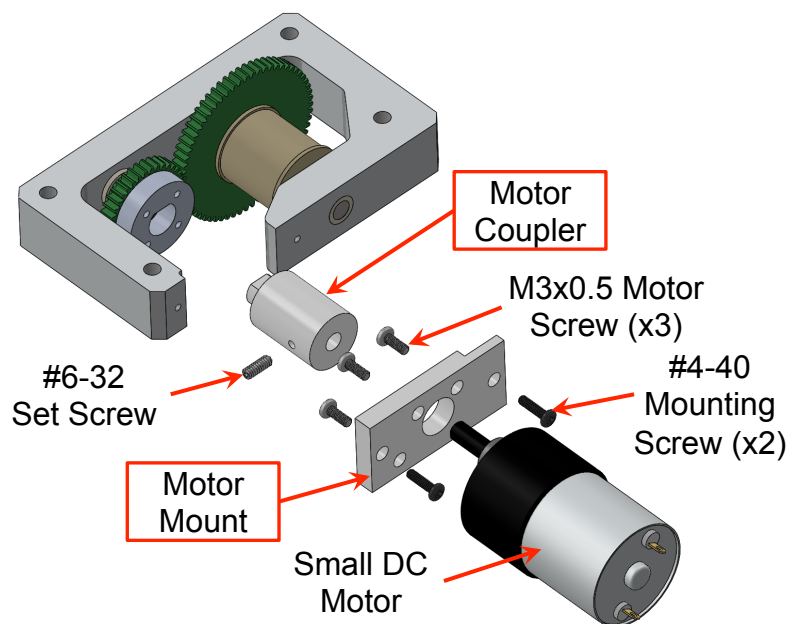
Exploded View of the Hoist Mechanism Drivetrain Before Assembly
